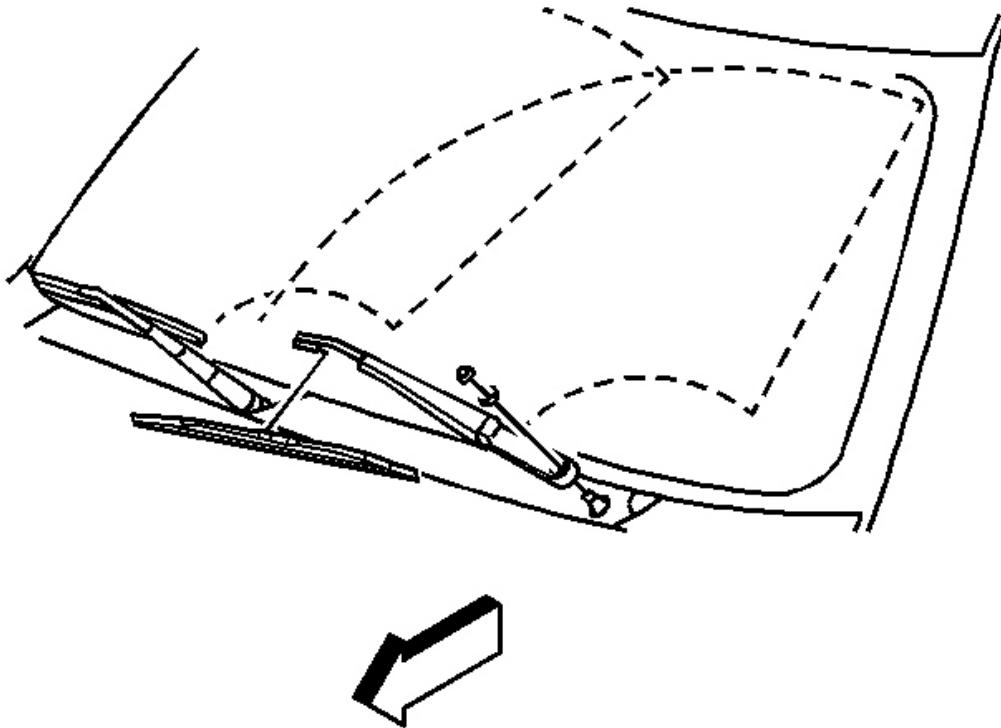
View Of Wiper Arm Blade & Wiper Arm
